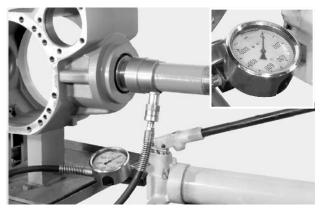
Connect the tension rod to the press and move the thrust block of bearings (3, 6) into the seats. Disconnect the press and remove the tension rod.
